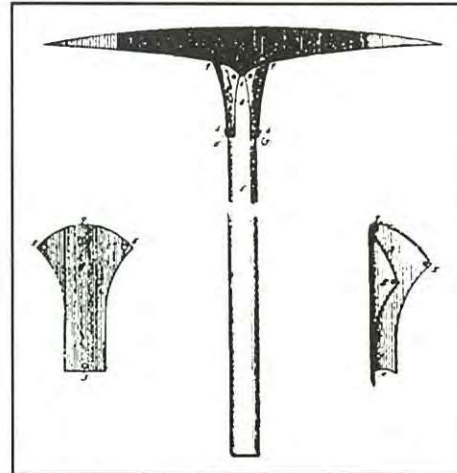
George Schoettle patented a practical two-piece sleeve for mounting Pittsburgh Pattern pickheads in Collinsville, Illinois in 1890. The corners of each plate had holes for screwing to the handle. (Pat. 458,528)
